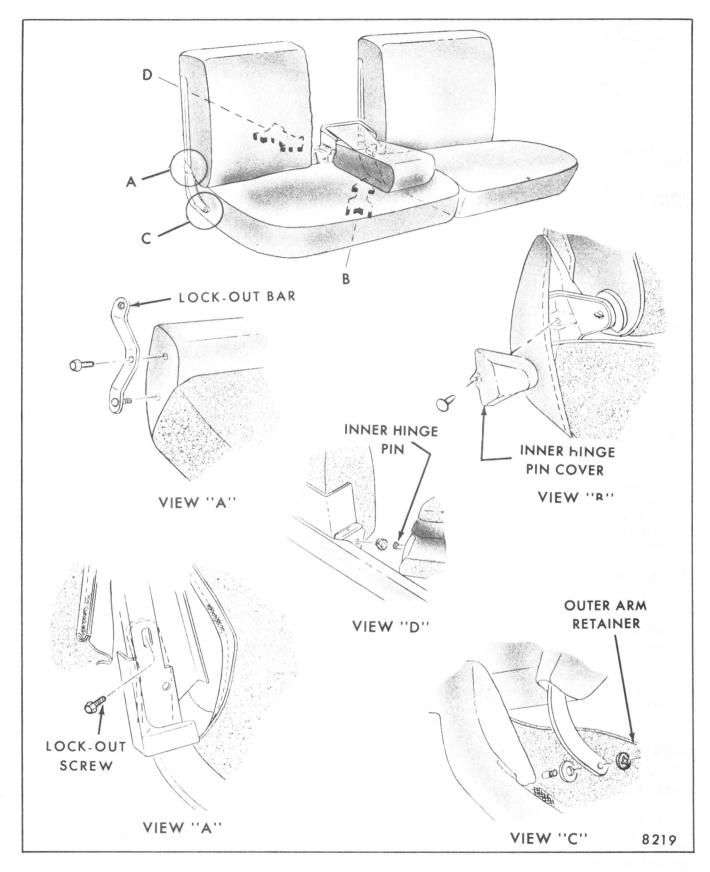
Front Seat Back Attachment (Right or Left) - Four- Door Style 60-40 Seat Shown (Typical for Four-Door Full Width Notch Down Center Armrest Seat and Four-Door 40-40 Seat)
